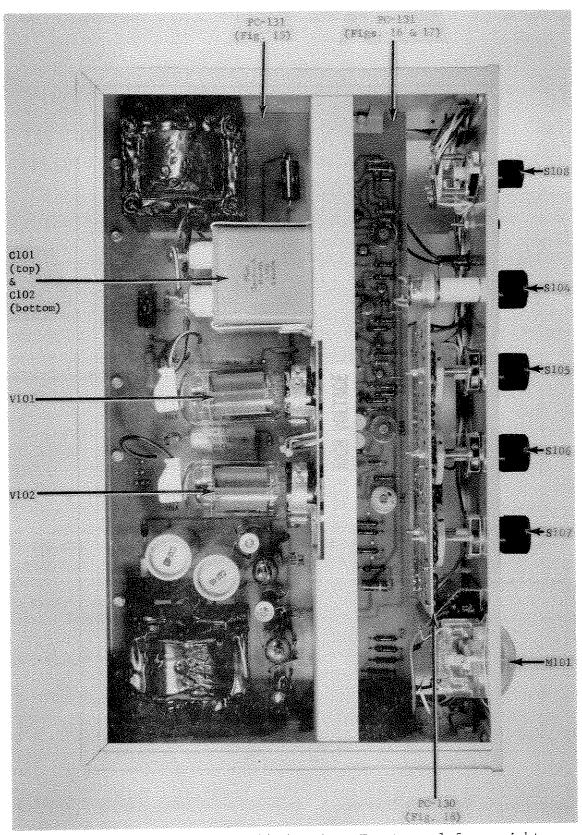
Top View of Model 246 Chassis. Front panel faces right. Figure shows components, switches and printed circuit locations. Refer to Figure 14 for bottom view.
